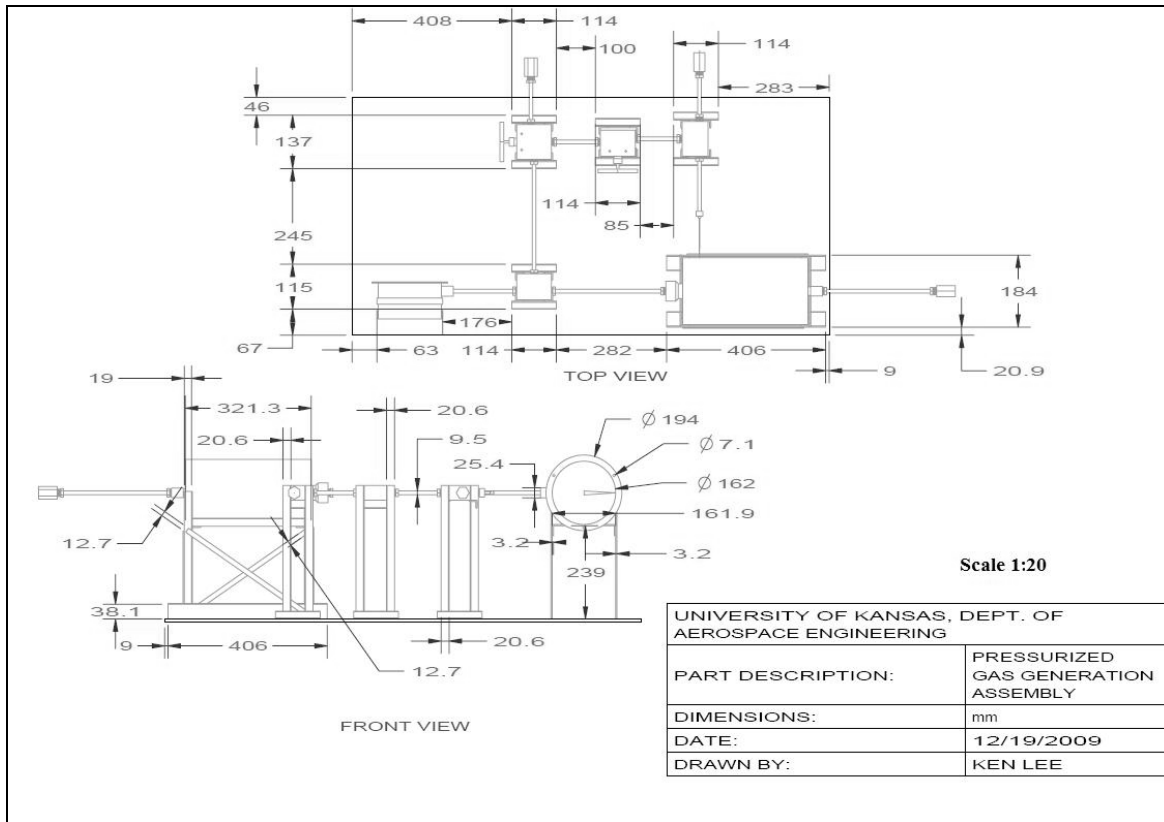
Top and Front CAD Views of the Pressurized Gas Generation Assembly Drafted in UG NX 6.0.
